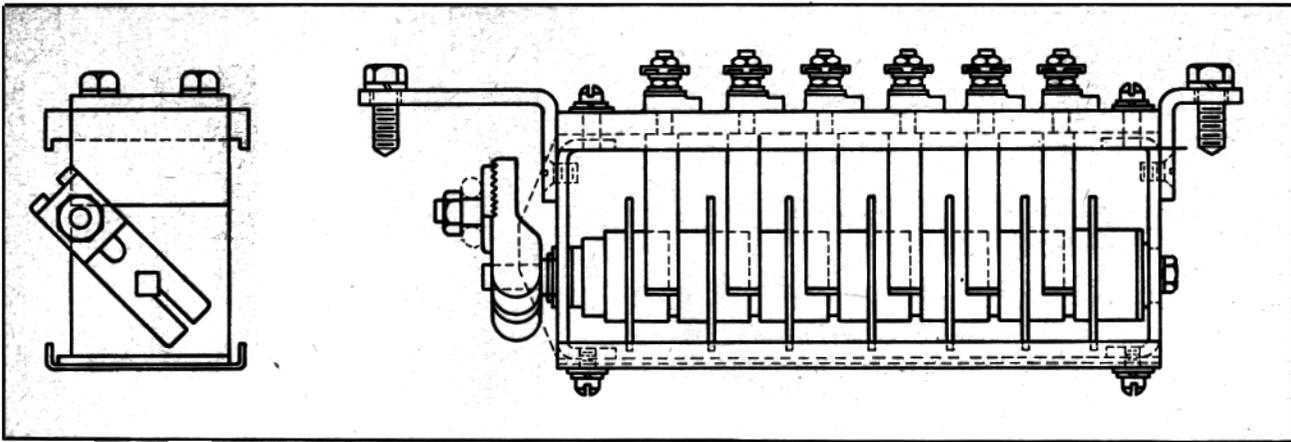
Six-Pole Rotary Auxiliary Switch Assembly
